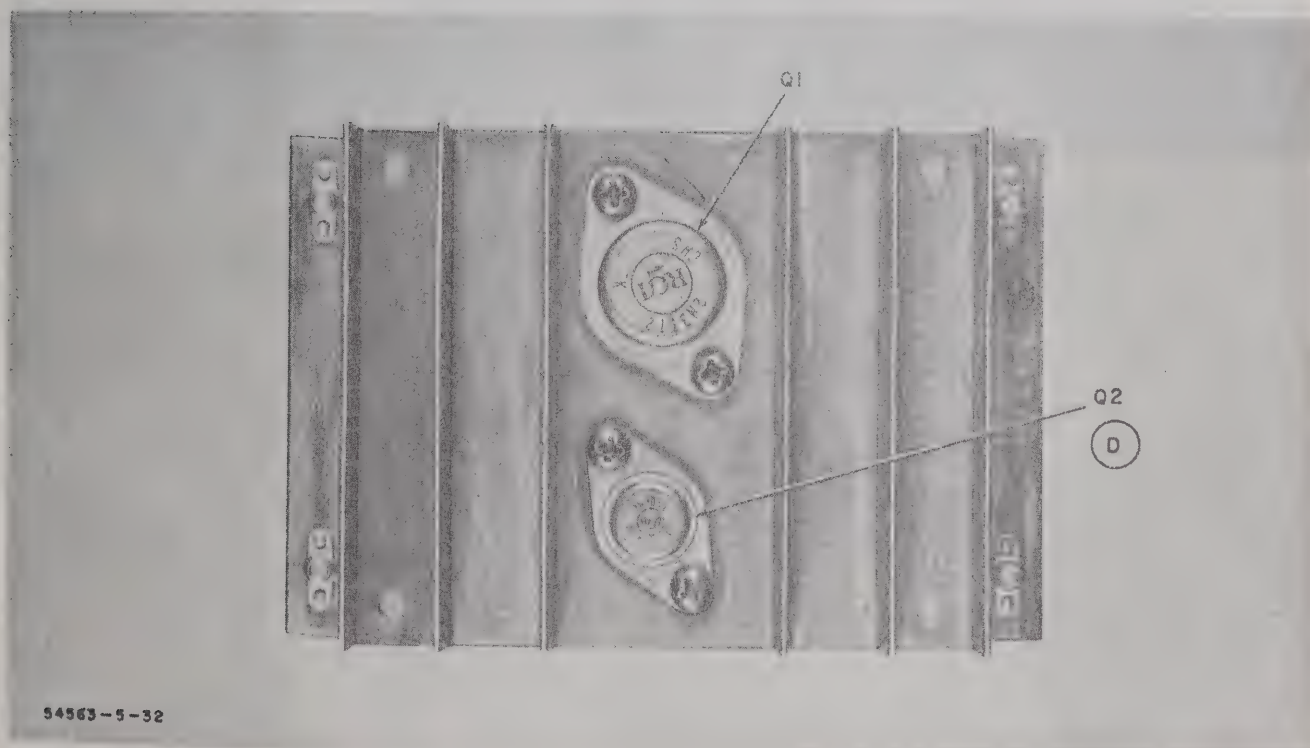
Heat Sink, ECI 67-02324-001, Part Location
